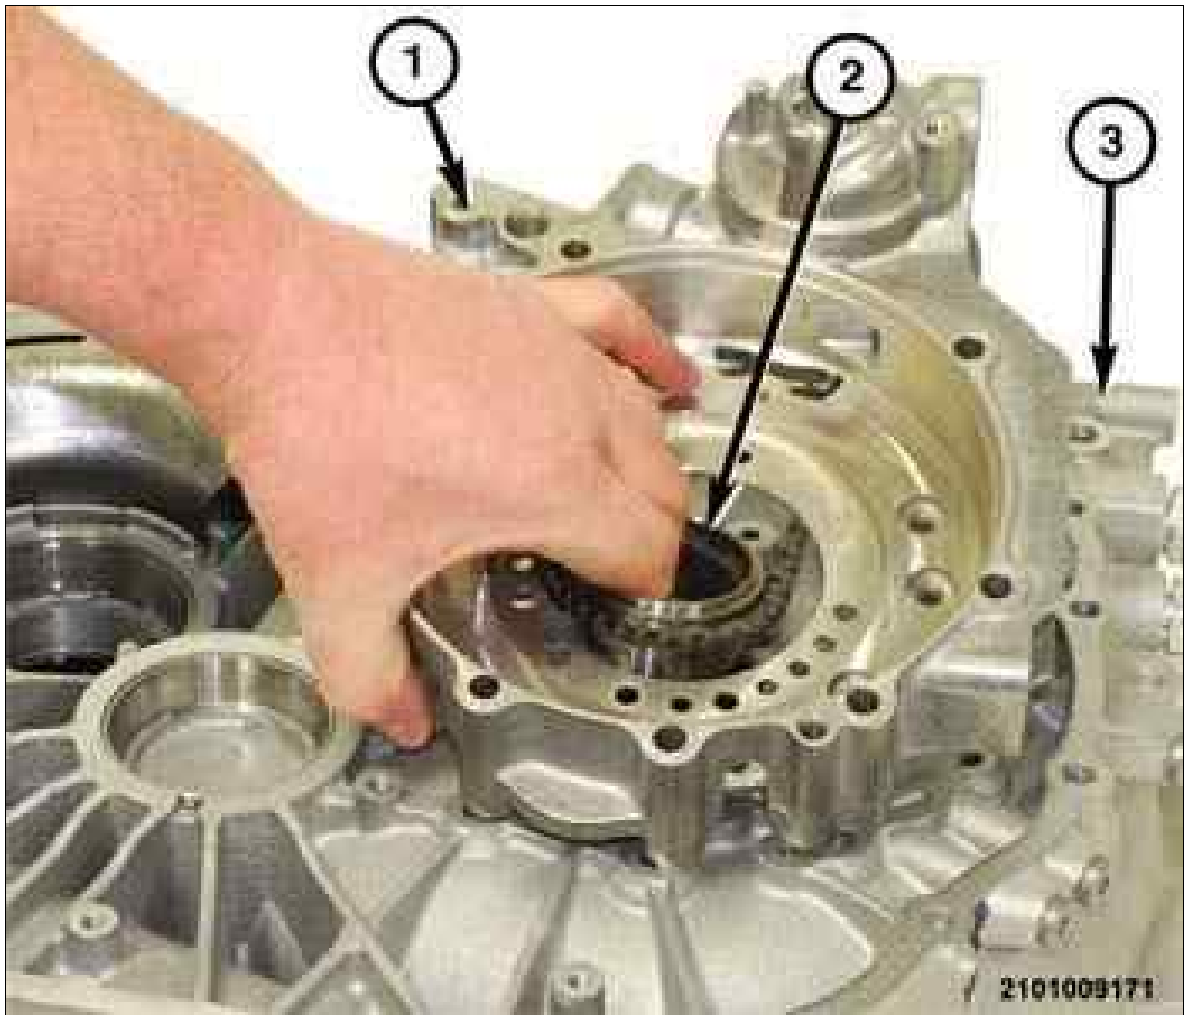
Oil Pump Drive Sprocket & Drive Chain
